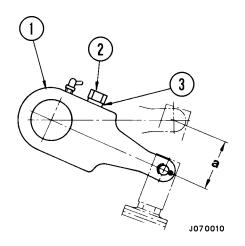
PARKING BRAKE ADJUSTMENT
